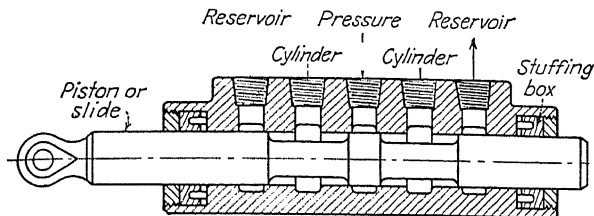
Piston-type 4-way valve. (Courtesy of Aircraft Hydraulics.)
